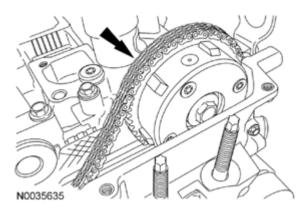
Locating Timing Chain On Intake Camshaft Drive Gear Courtesy of FORD MOTOR CO.
